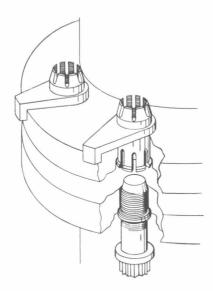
Drawing of a typical captive nut and bolt assembly.
